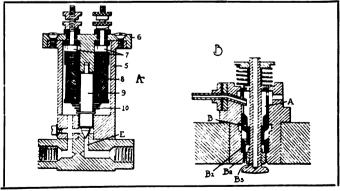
Details of the Bellem Motor: A, Magnetic Control, Current to Which Is Supplied by Low-Tension Magneto; B, Automatic Valve and Ports for Fuel and Air.
